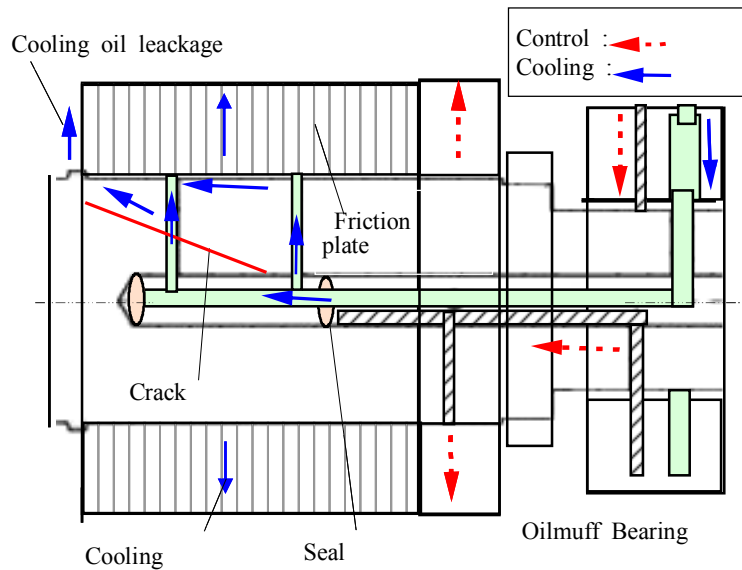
Initial stage leakage of cooling, lubricating and clutch control oil¹⁾
